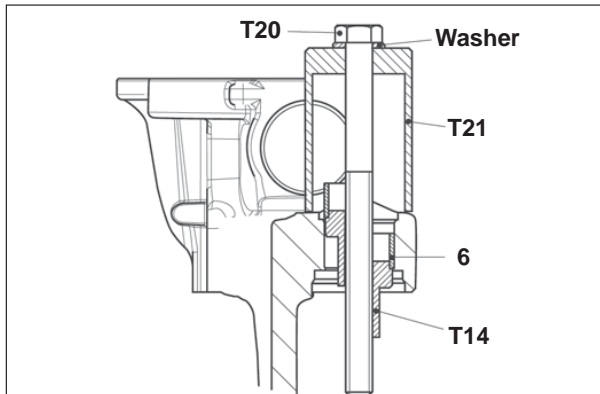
SECTIONAL VIEW: SHORT GUIDE PIN BUSHING REMOVAL
